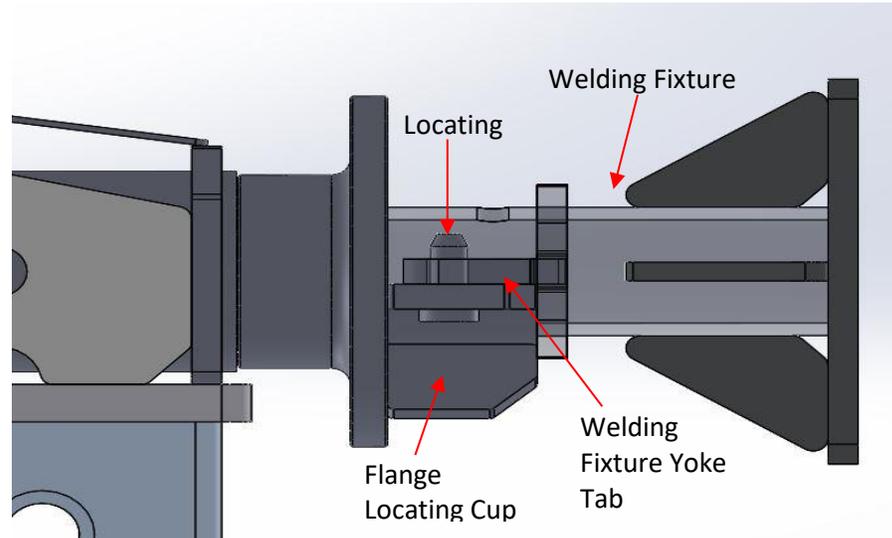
Final Drive End Design, Shaft Retracted from Welding Fixture Yoke
